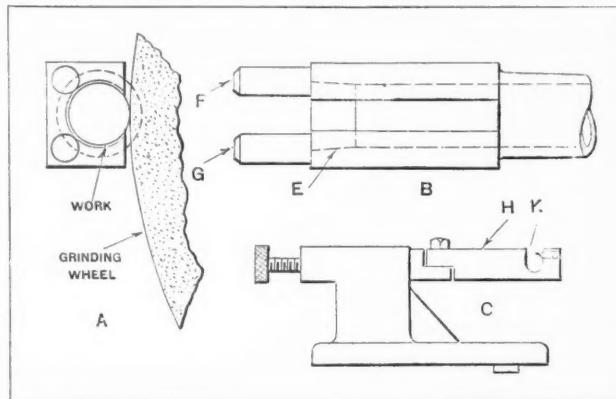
Attachments for Centerless Grinding Operations on Steel Tubes
